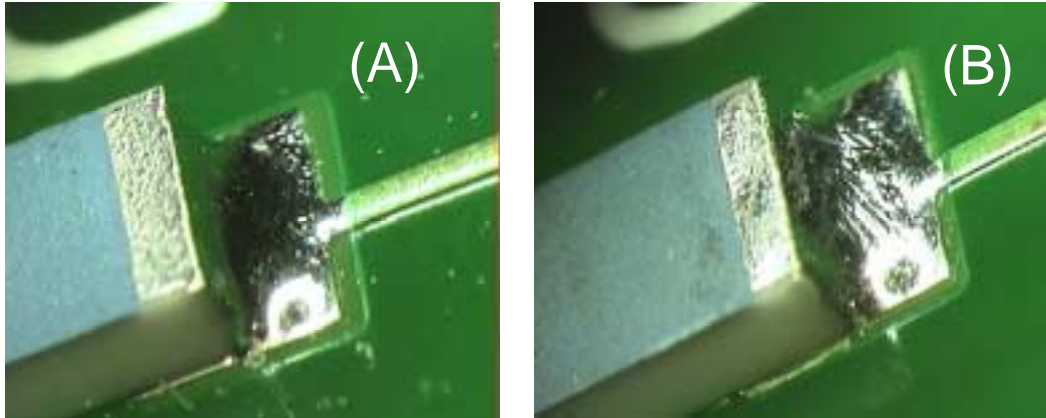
(A) Solder Joint Produced Using Tin/Lead Solder and Finishes;
